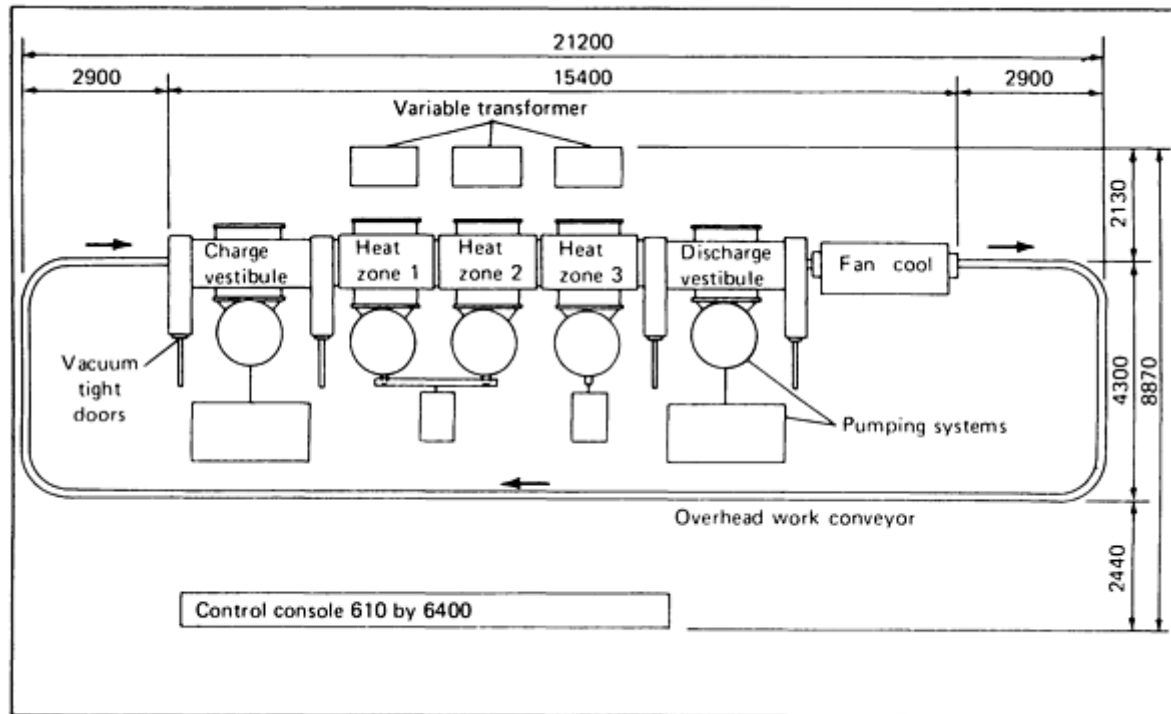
Automatic vacuum furnace for fluxless aluminum brazing. Dimensions given in millimeters
